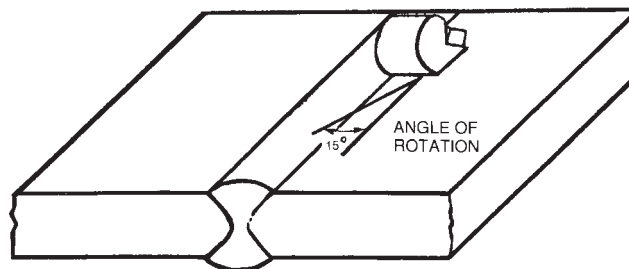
Supplementary Technique 3, for Inspecting Butt Welds for Suspected Cross-Cracking when the Weld Bead is not Ground Flush
